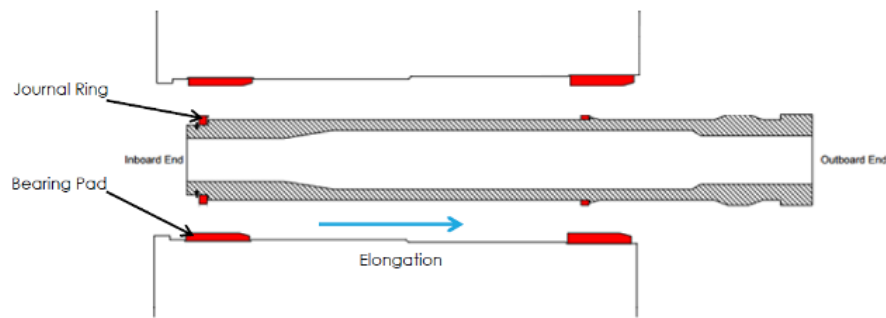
FUEL CHANNEL ELONGATION BEARING AND JOURNAL RING
